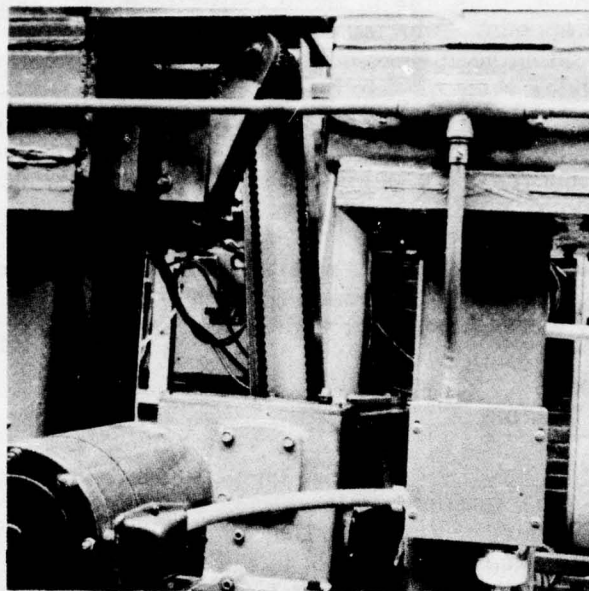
Two-Horsepower Motor and Gear Box Arrangement for the Flat Plate Welding Fixture
